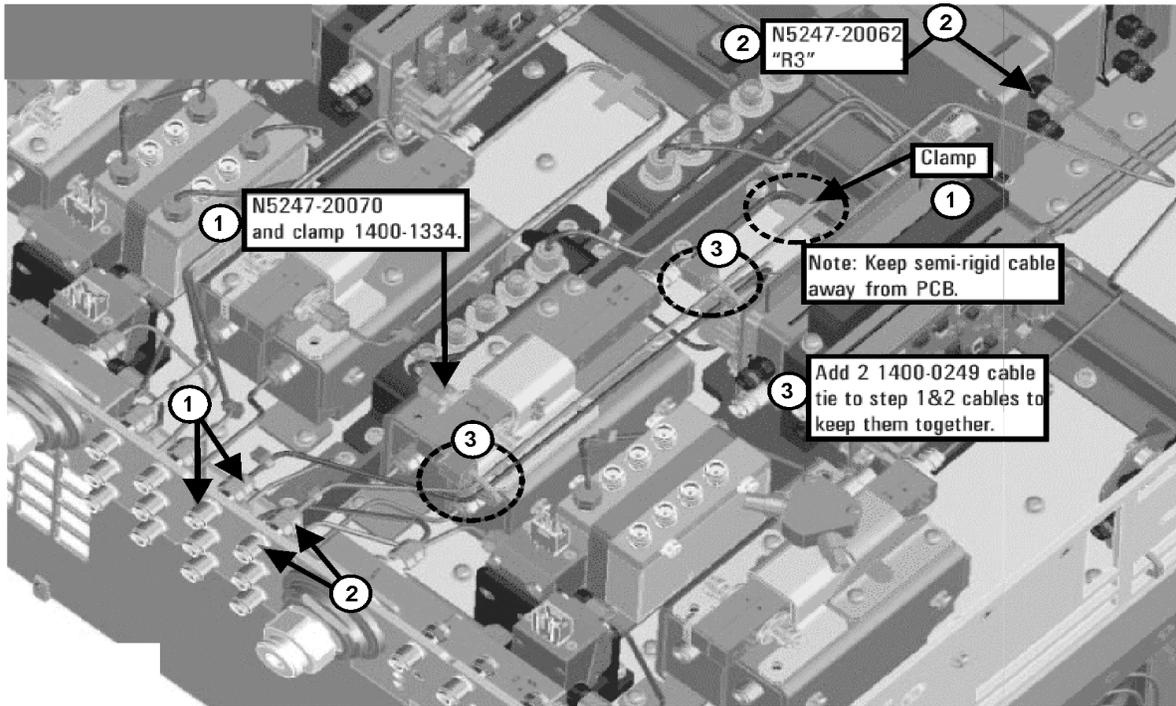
Location of Cable Clamp to Secure W41 and Cable Tie to Secure W55 (1400-0249, 1400-1334, N5247-20067, N5247-20069)
